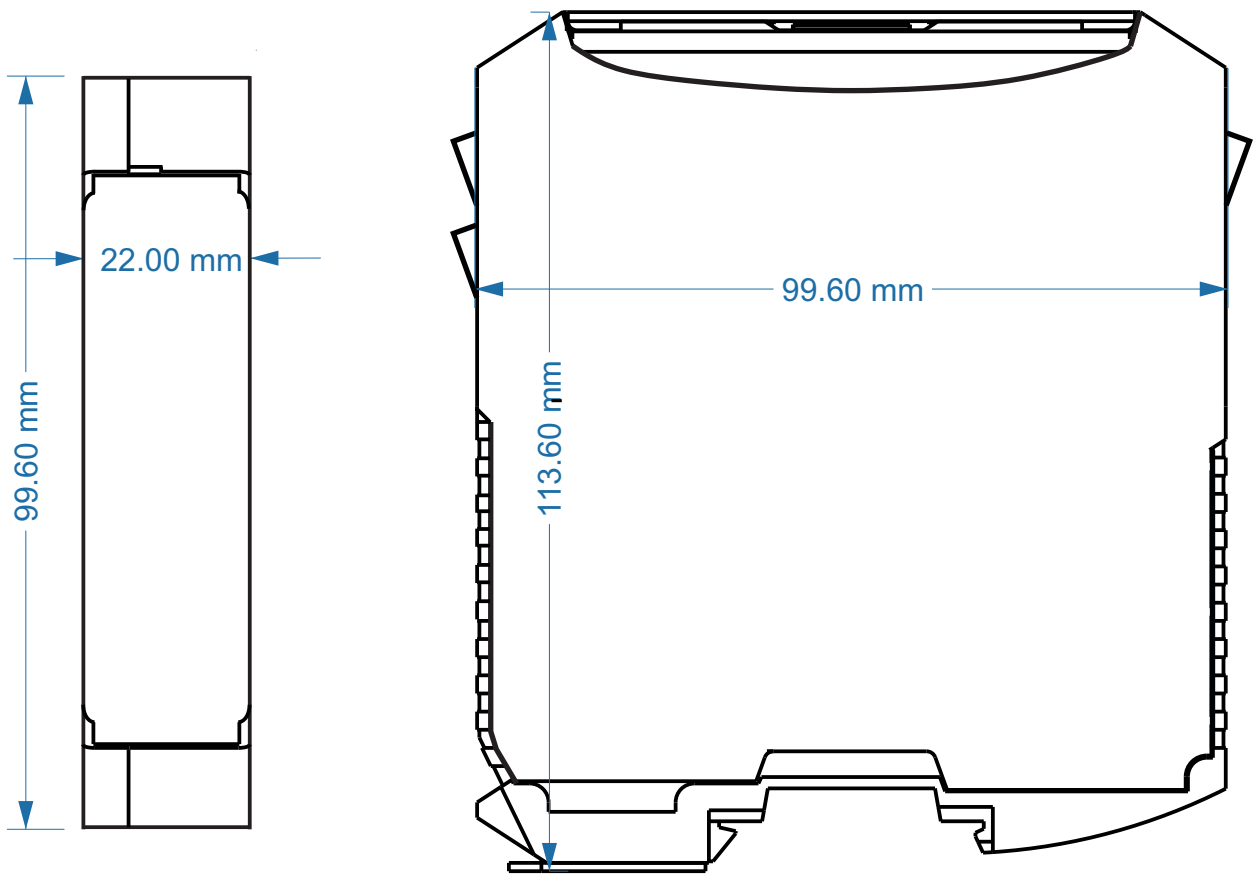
Front view and Side view Dimensions of Thermocouple Input module
